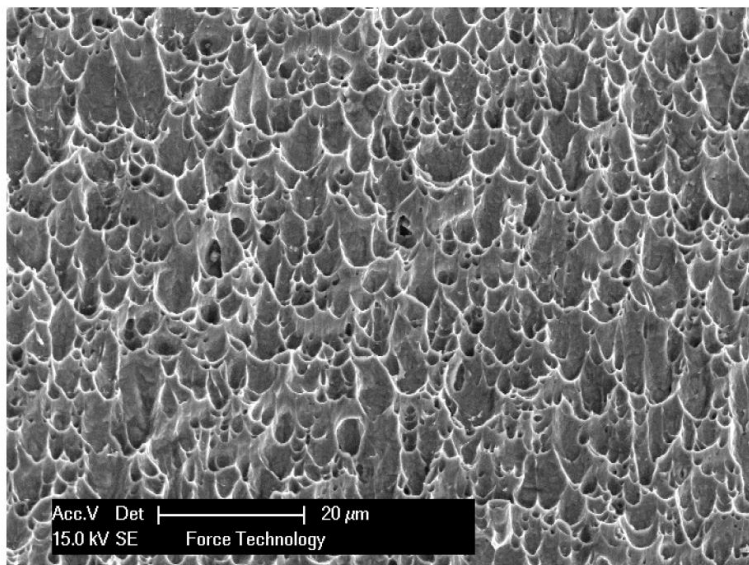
SEM micrograph of nose wheel steering fork right side fracture surface displaying ductile fracture confirmed by shear dimples.
